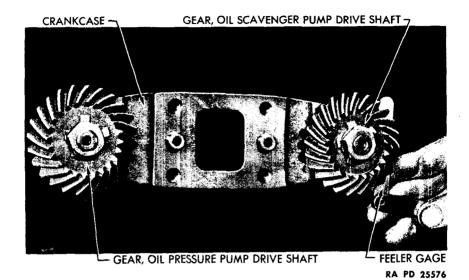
Checking End Play In Oil Pump Drive Shafts
